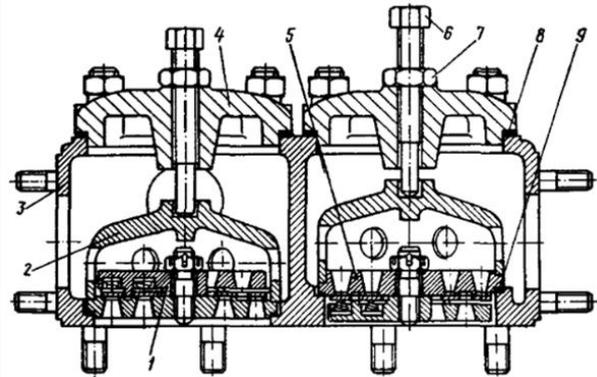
Valve box of the first stage cylinder of the KT6ЭЛ compressor: 1 – discharge valve; 2 – valve stop; 3 – case; 4 – cover; 5 – intake valve; 6 – clincher; 7 – locknut; 8 – paronite gasket; 9 – copper gasket
